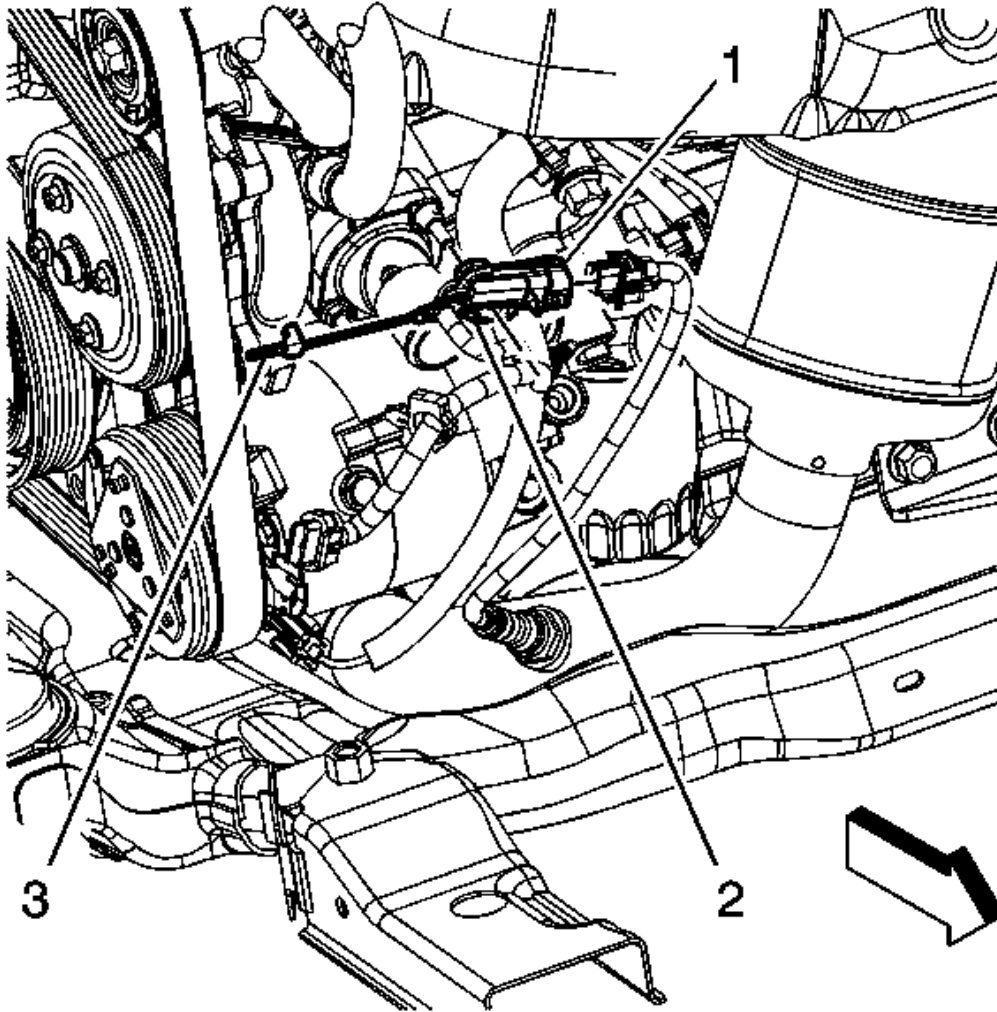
Identifying Connector Position Assurance (CPA) Retainer
